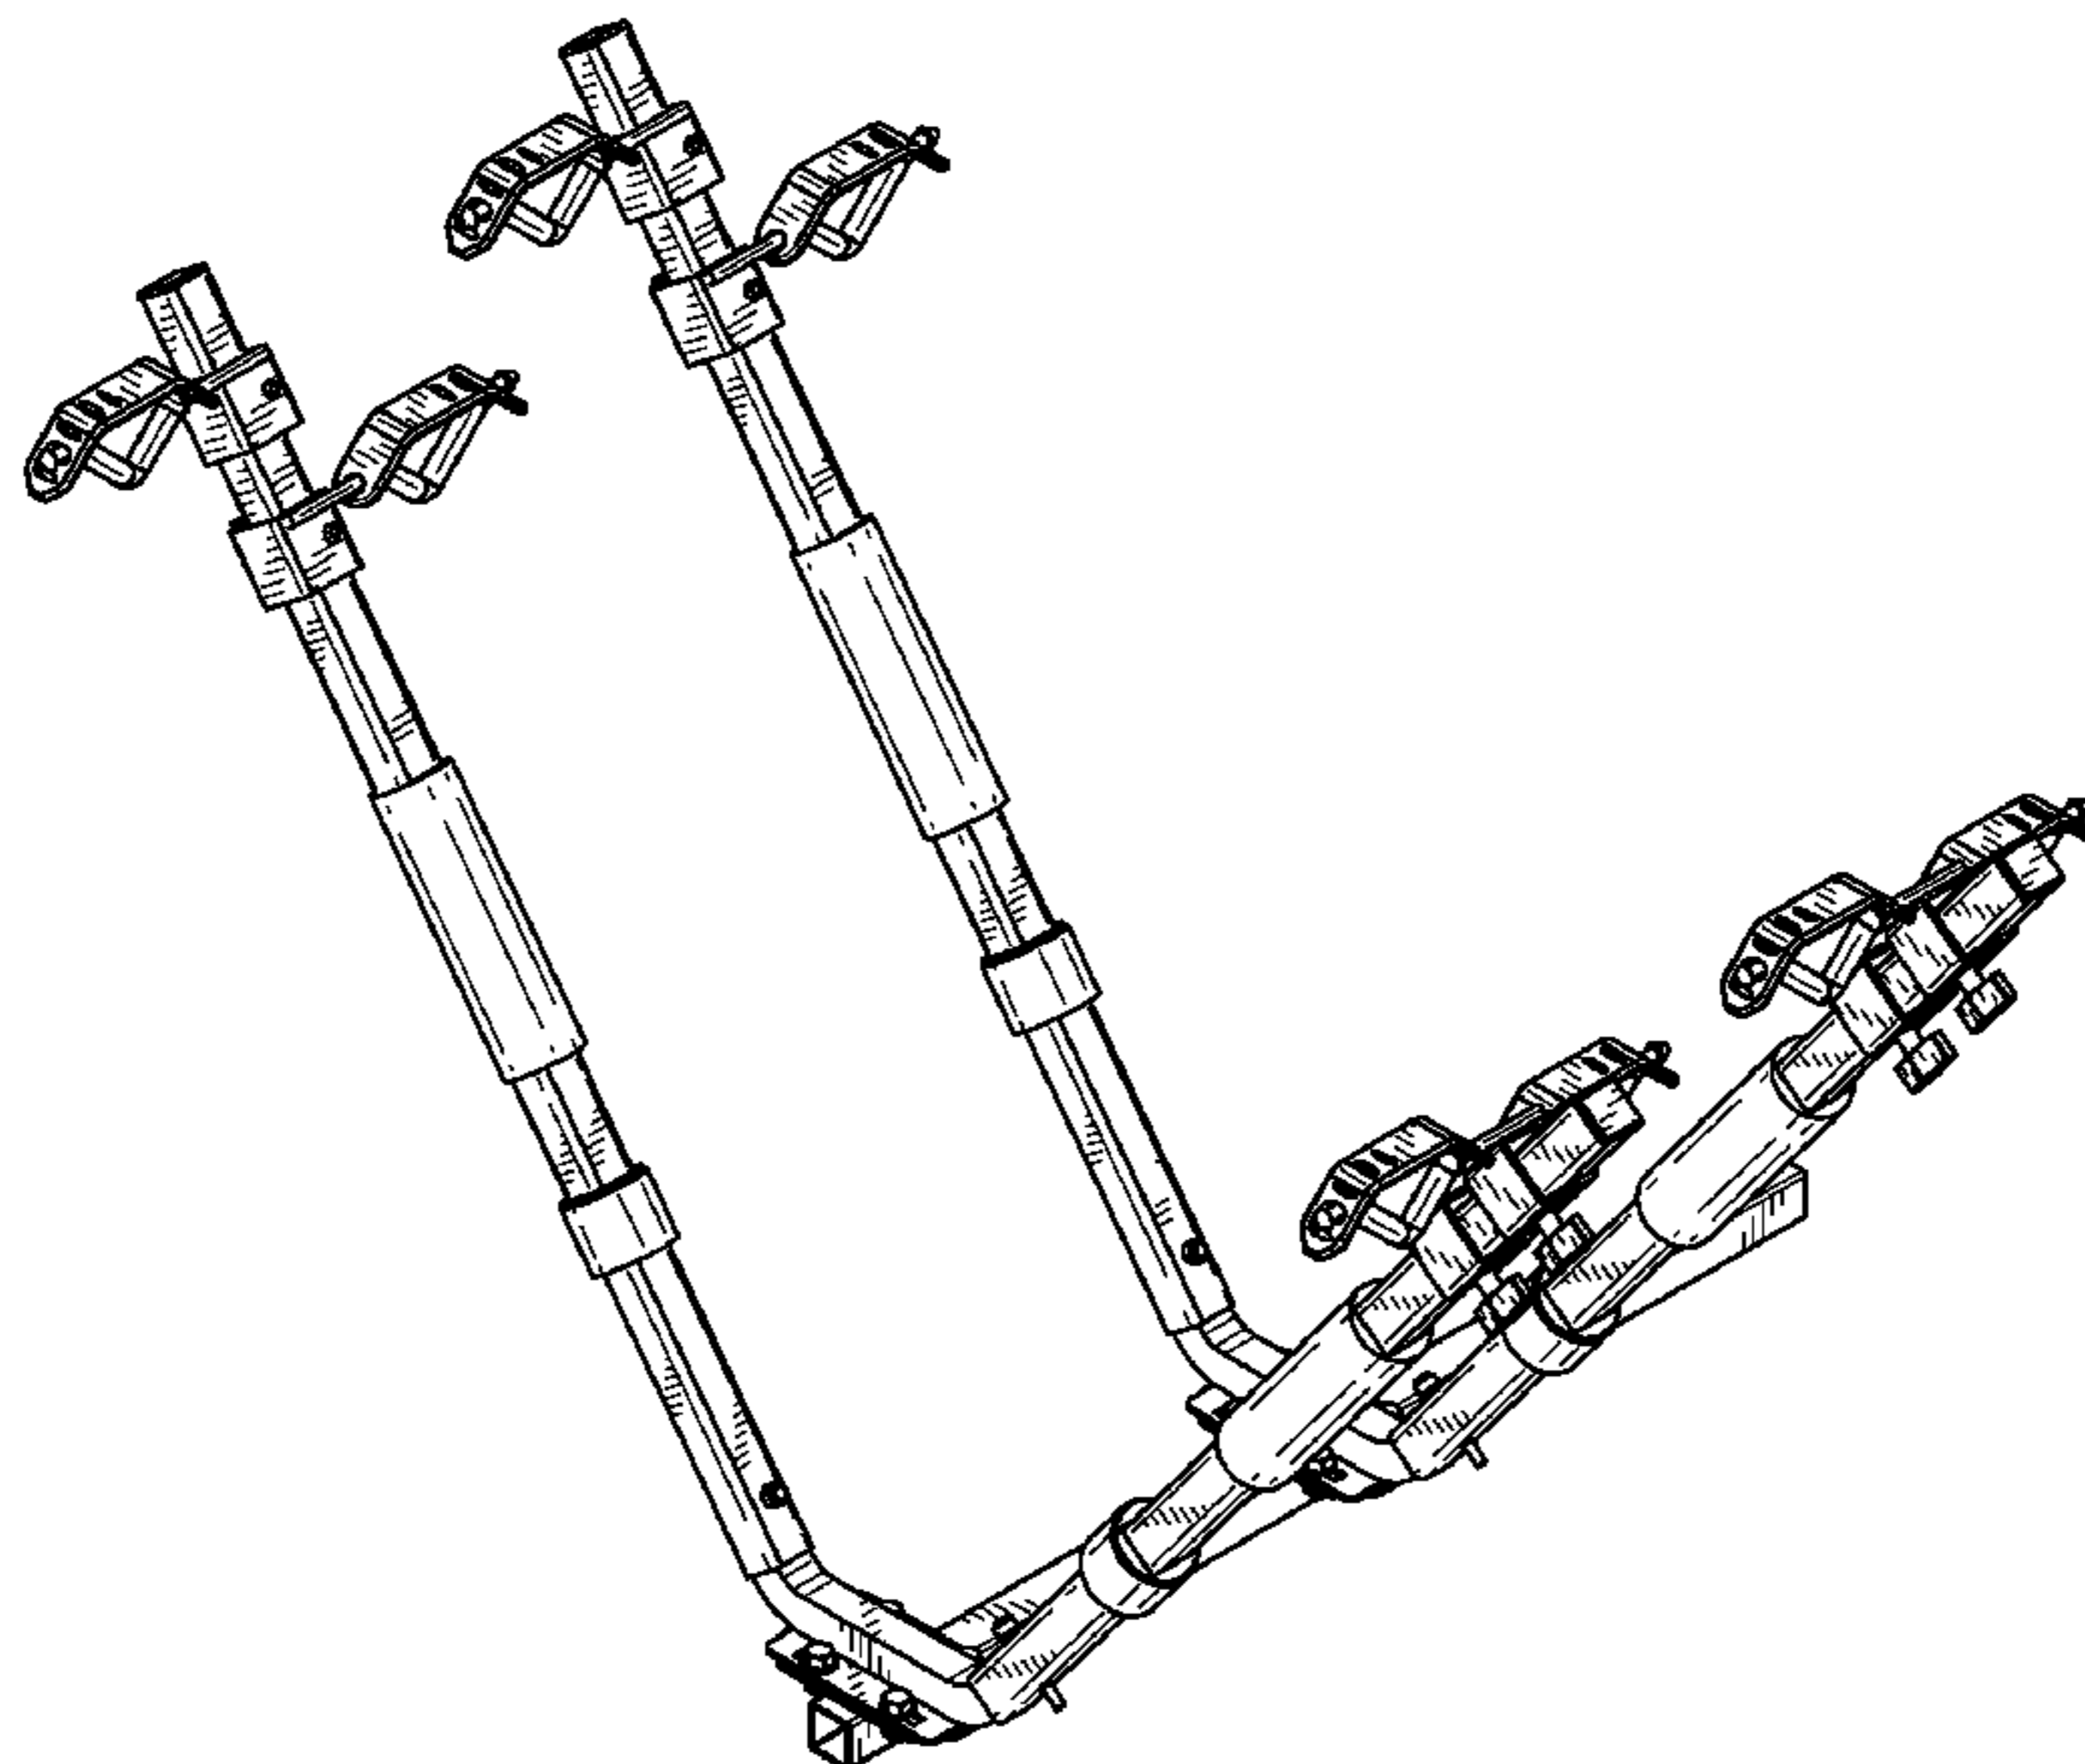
is a side view of the V-shaped four bicycle carrier.
